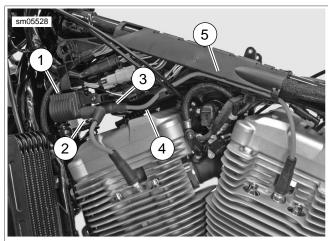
Ignition Coil and Left Wire Harness Caddy: XL Models
